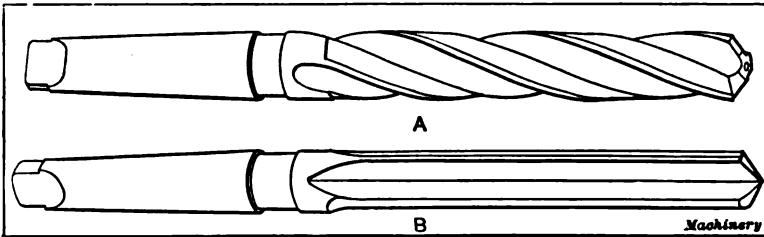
A) Three-groove Drill. (B) Straight-fluted Drill
